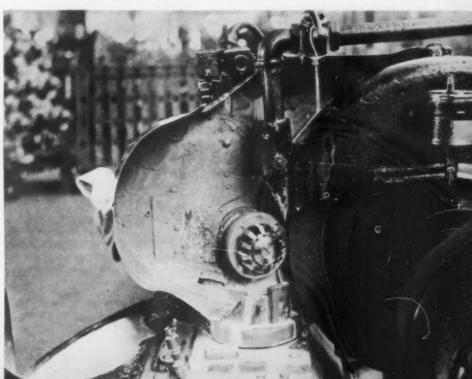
Special fixture for inspecting each gear after radial grinding of the backs.
